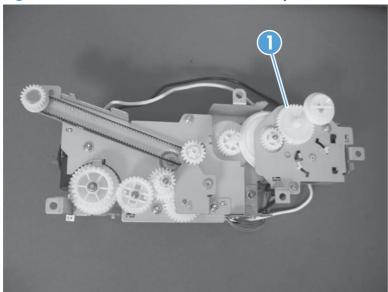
Remove the fuser-drive assembly (6 of 6)
